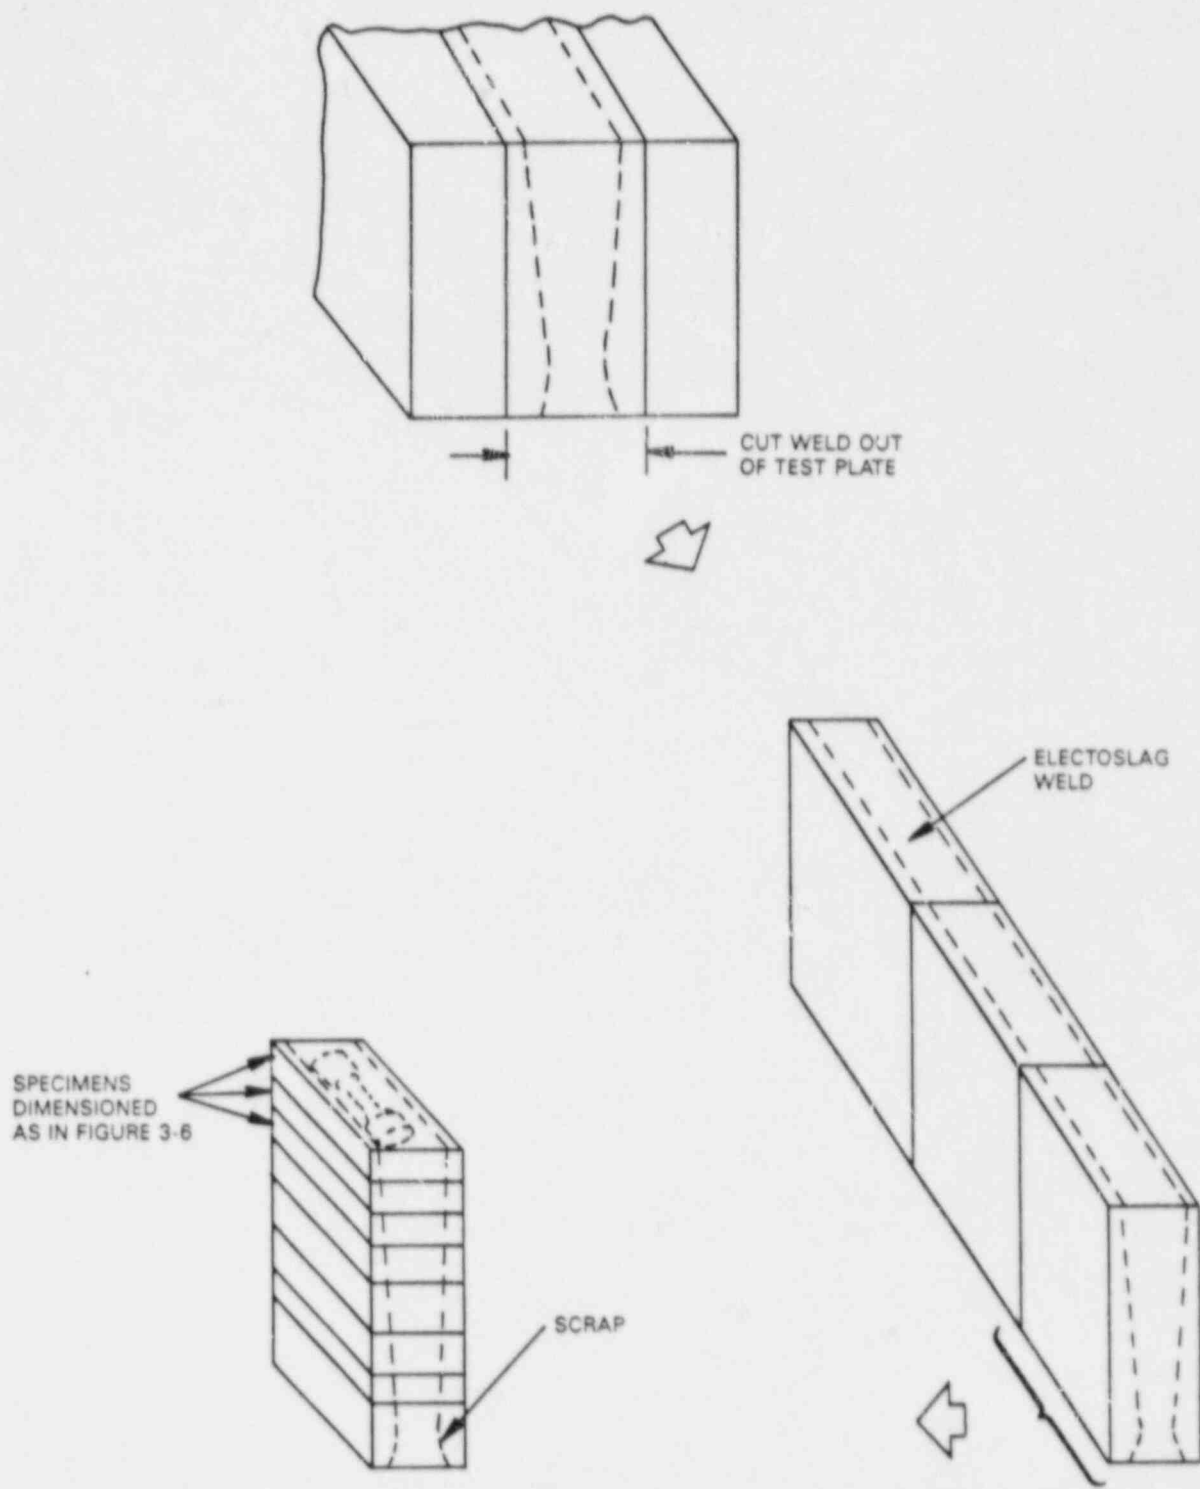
Fabrication Method for Weld Metal Tensile Specimens
